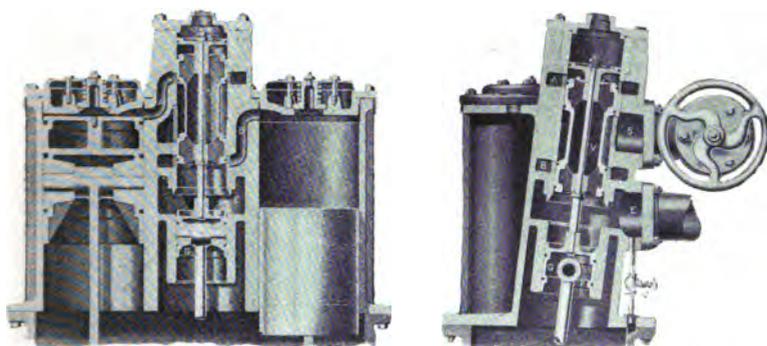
DETAIL, SHOWING CYLINDERS, PISTONS, STEAM CHEST AND VALVE.
